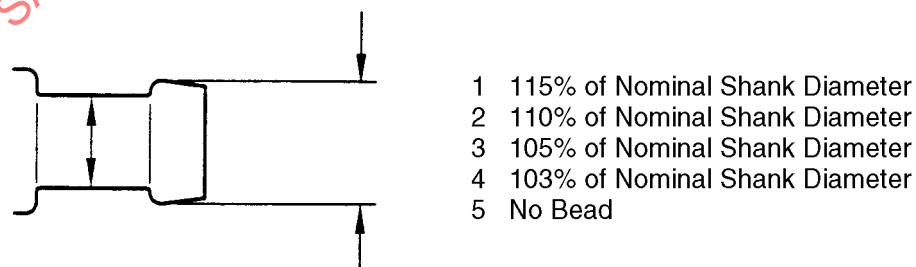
HOSE ASSEMBLY—BEAD DIAMETER
